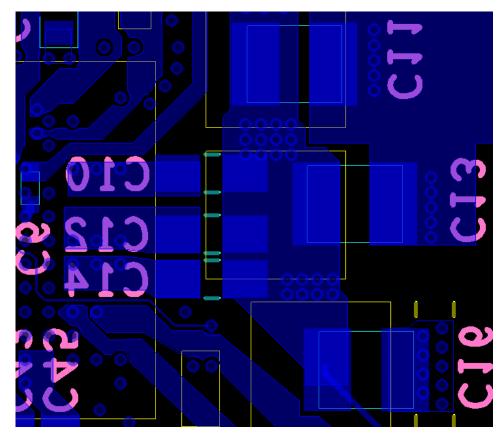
Bottom-Layer Zoomed-In View of SMPS123 Input and Output Capacitor Layout
